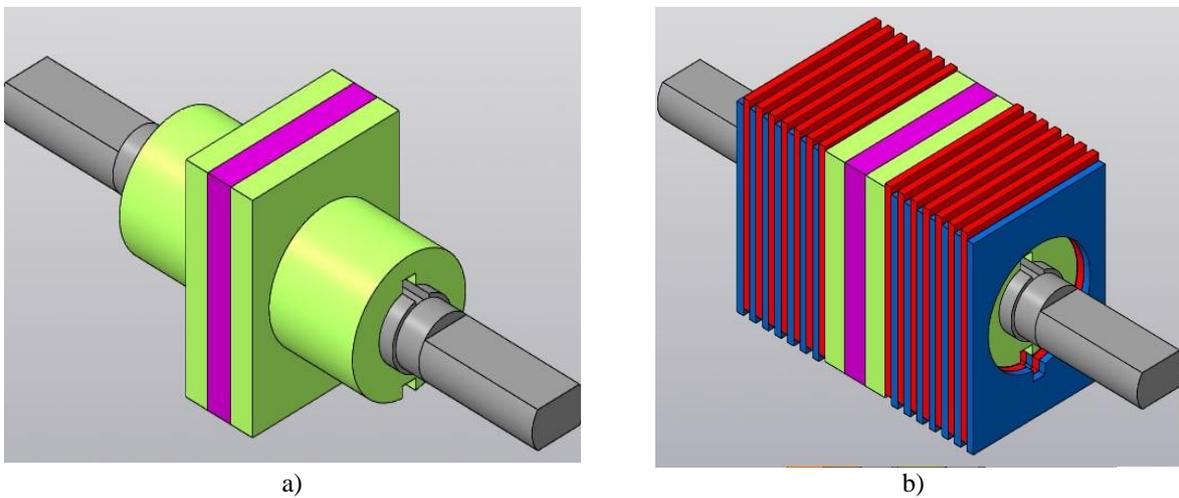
Moving elements of the linear generator: a) shaft with bushings and a permanent magnet; b) toothed rotor.
